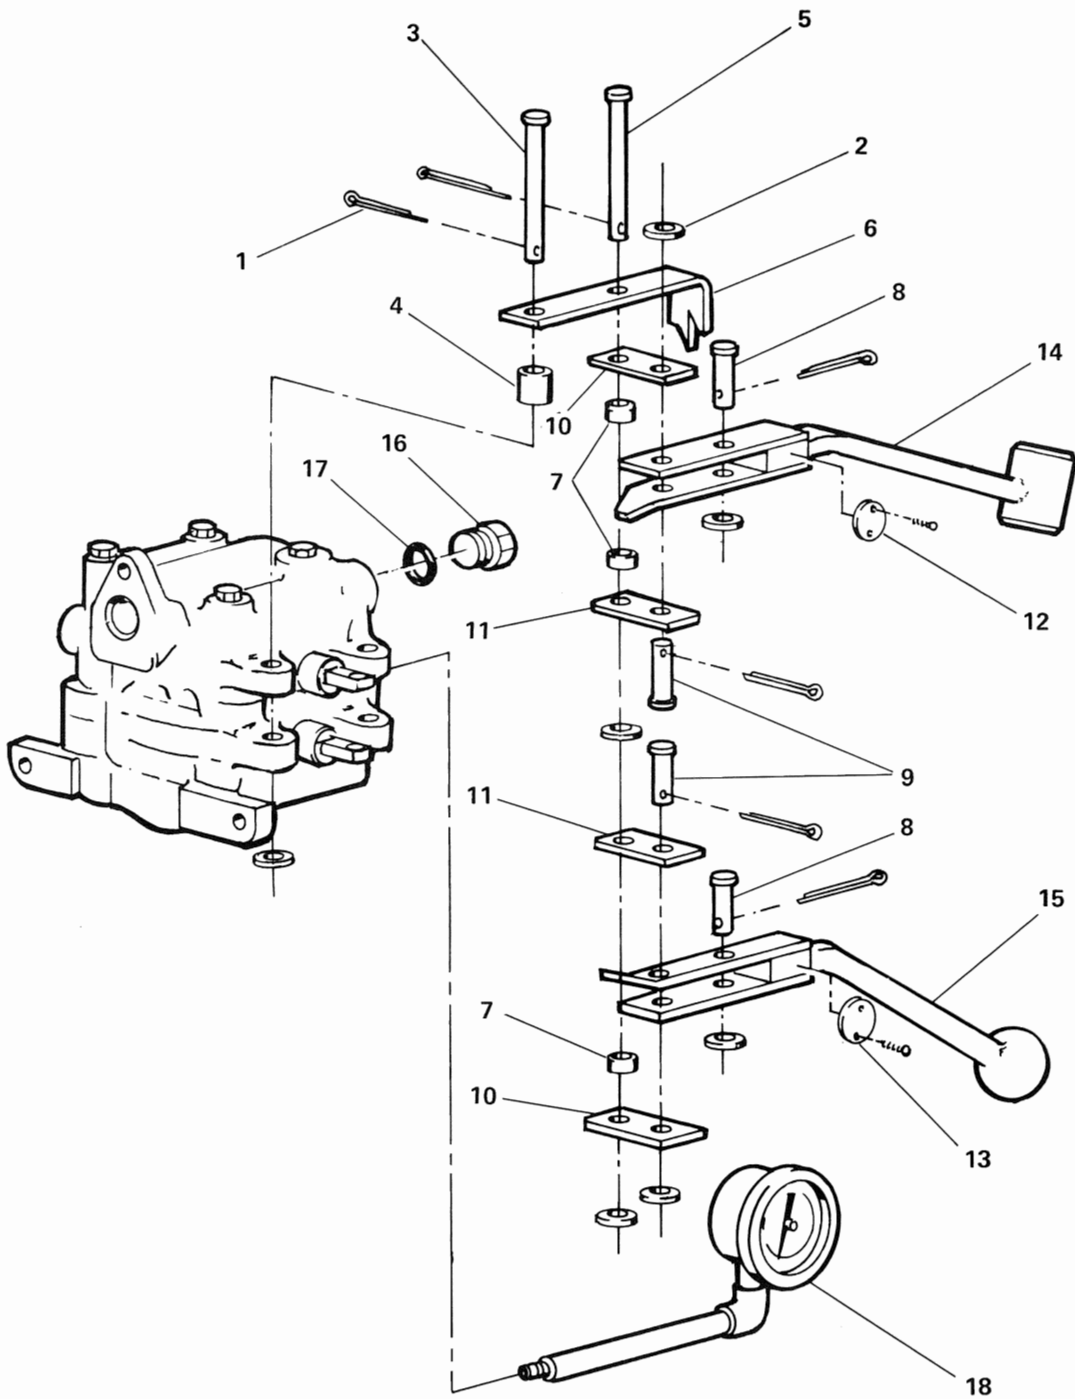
RH Direction Control Lift and Torque Valve Assembly (Sheet 1 of 2)
